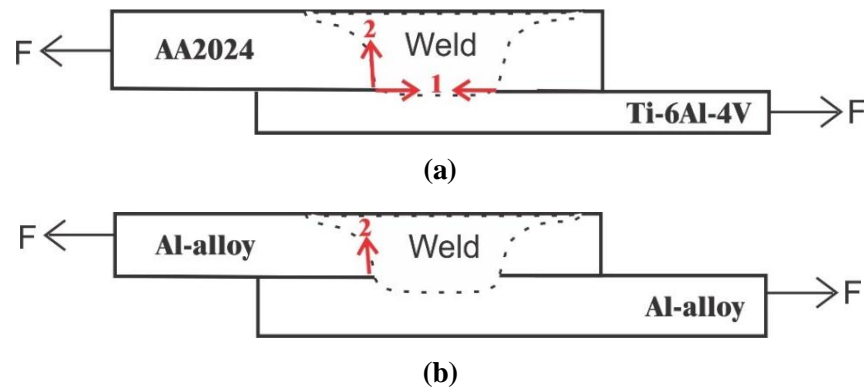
Illustrations of (a) AA2024-to-Ti6Al4V weld with thicker top plate and (b) Al-to-Al weld with equal top and bottom plate thickness. Fracture path 1 and path 2 are indicated by arrows.
